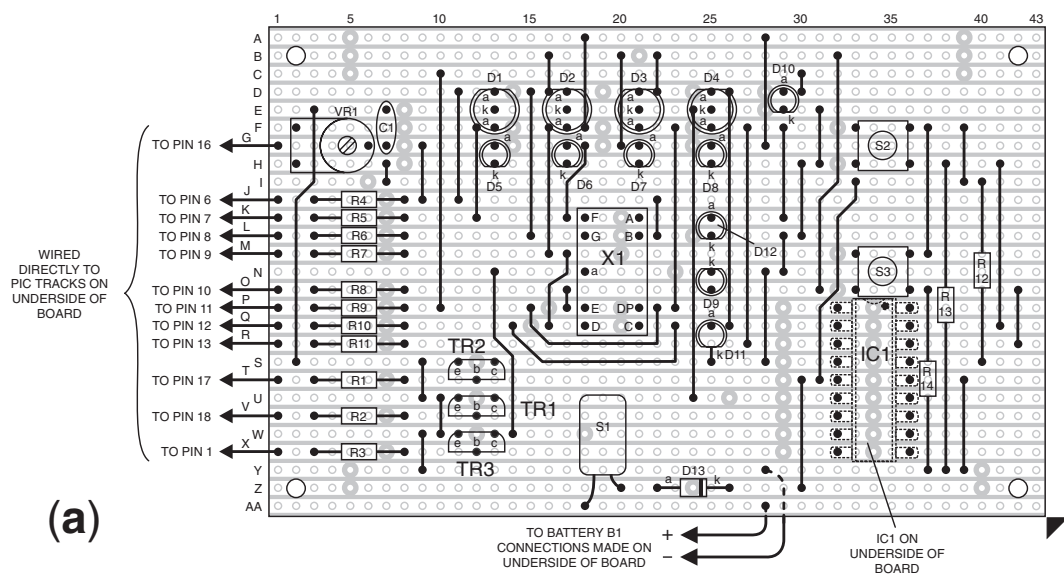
Stripboard component layout and details of breaks required in the underside copper tracks. The PIC d.i.l. socket is soldered on the trackside and the interconnecting wiring is shown in diagram (c).
